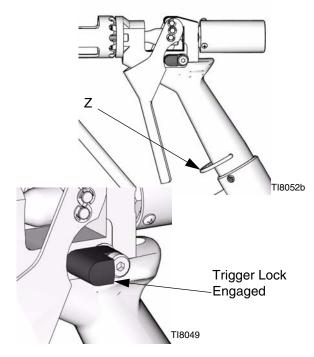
Trigger Retainer Unlocked and Trigger Lock Engaged
